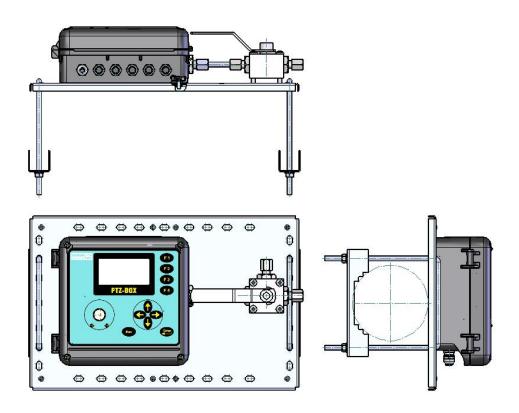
Mounting of the PTZ-BOX 3.0 to the mounting plate
